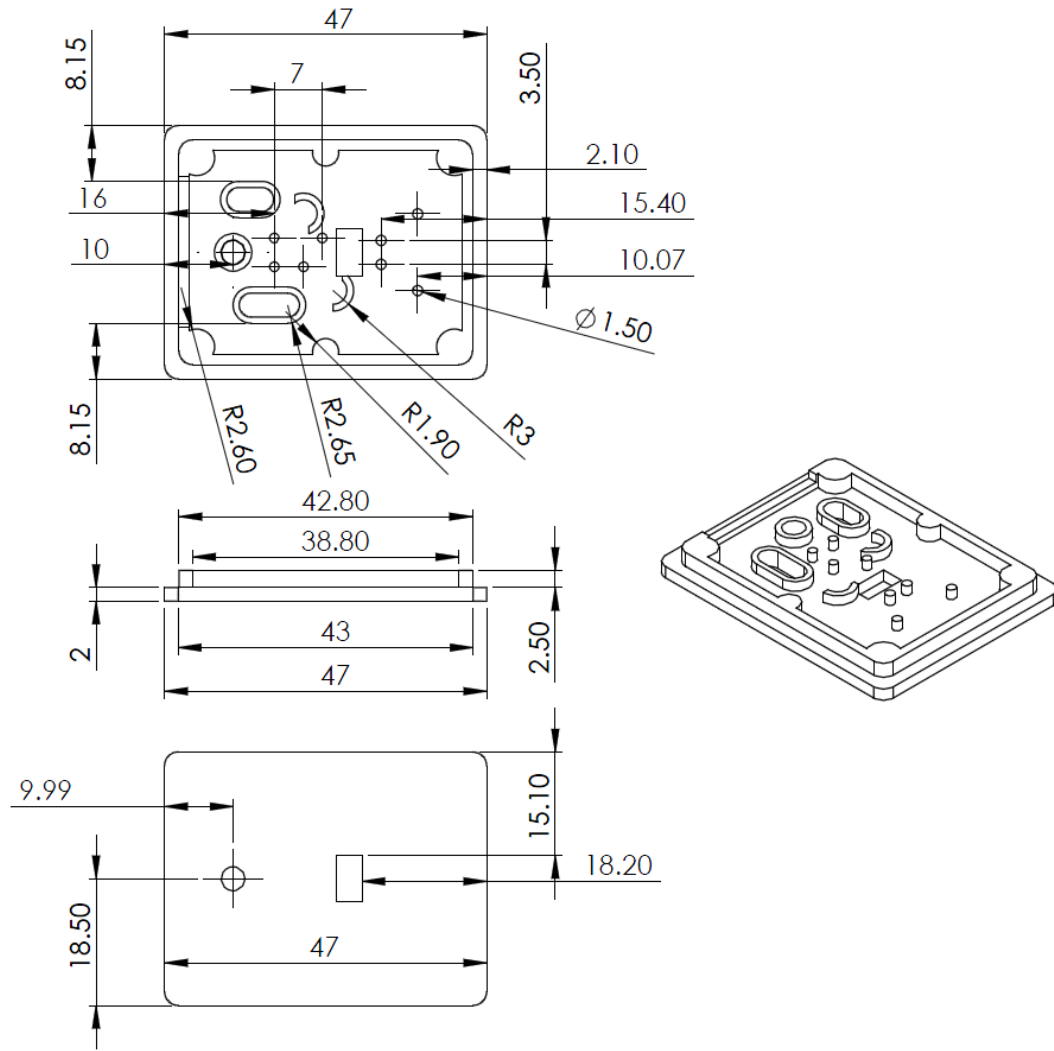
Dimensions [mm] for housing (Top with reagent storing)
